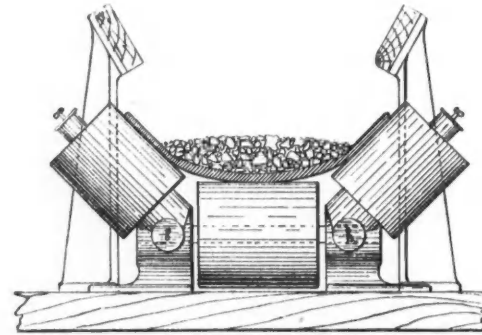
BELT SUPPORT AND SKIRT BOARDS.
